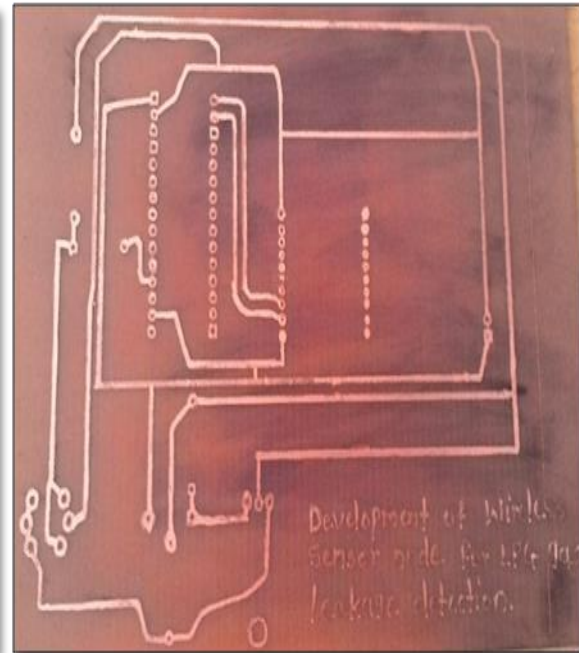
b) PCB layout of a wireless gas sensing system.
